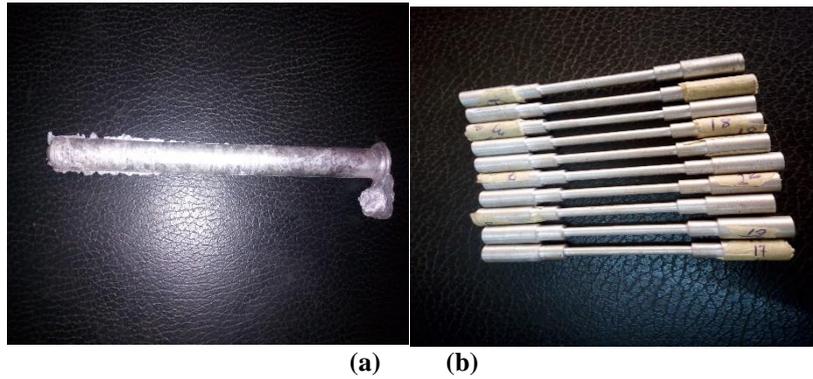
(a) Cylindrical casting for machining tensile specimens (b) Tensile Specimen
